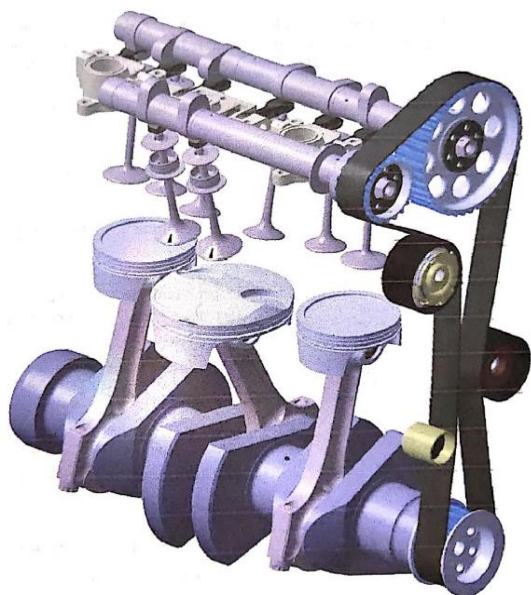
Internal View of the Main Components of the Five-Stroke Engine
